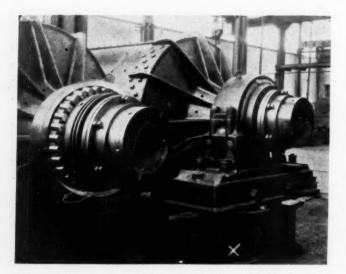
Manner in which self-aligning spherical roller bearings are adapted to a ball and tube mill
